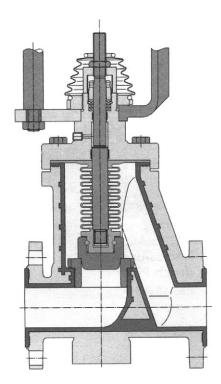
A lined single-seat globe valve Courtesy of Richter Chemie-Technik GmbH
